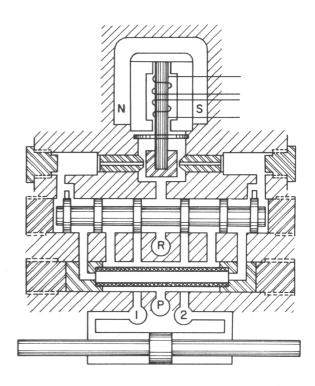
Schematic of Cadillac Gage FC-200 Valve
